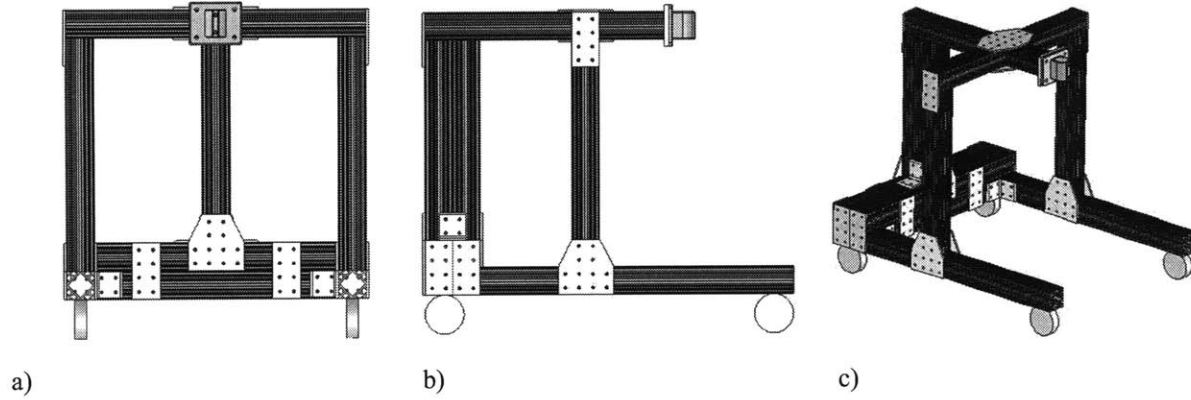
BWS frame, a) front view, b) side view, c) isometric view.
